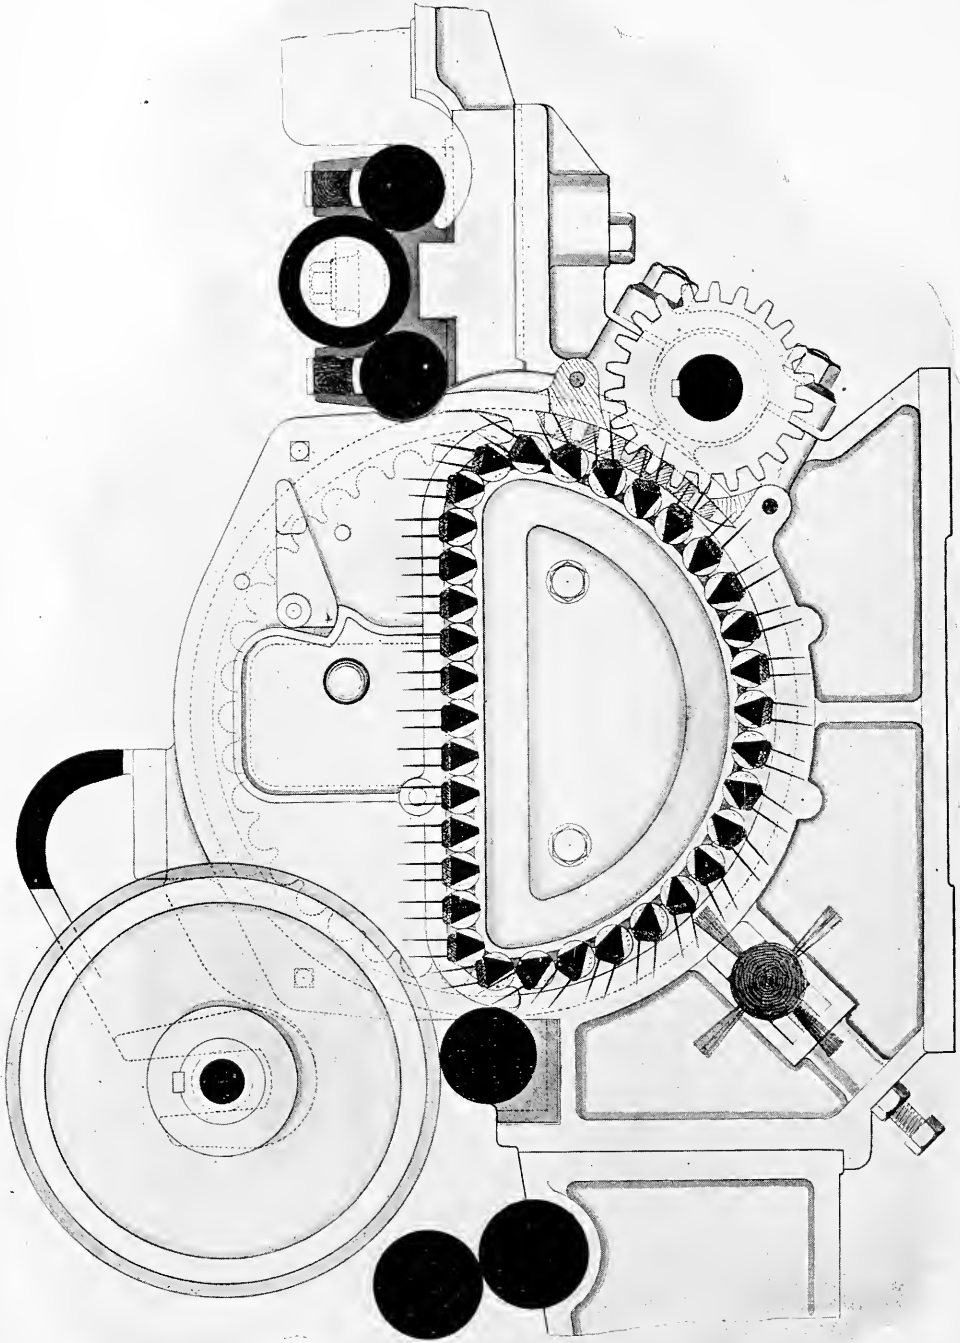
Section through bars of Fraser's patent "ring" drawing frame for jute.
